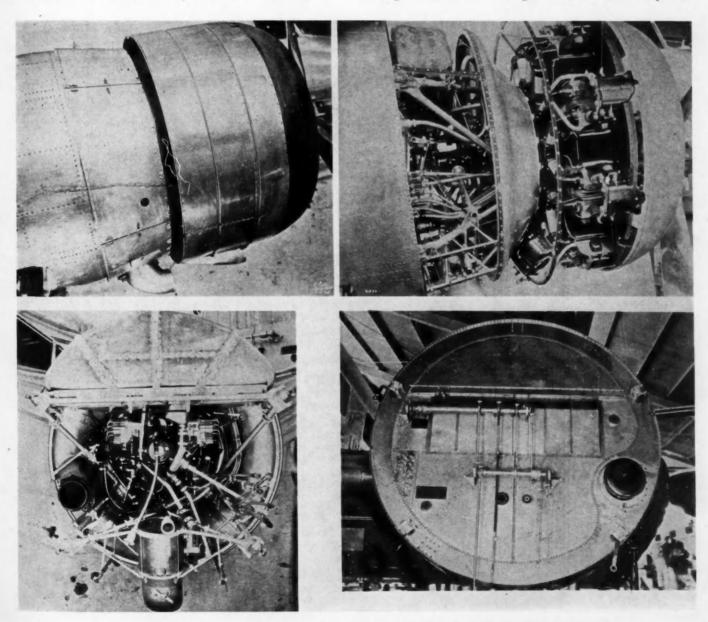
Pegasus-Douglas Installation with Standardized Power-Unit Construction
